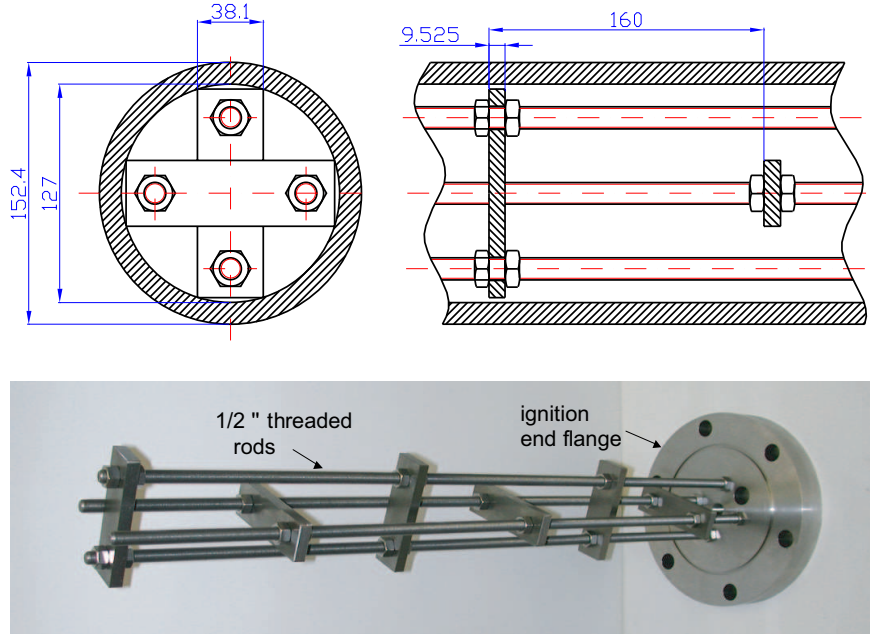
Top: Drawing of an obstacle pair mounted in the tube, units are given in mm. The blockage ratio is 0.37 and the obstacle spacing is $1.25 D$. Bottom: Photograph of obstacle assembly outside the tube.
